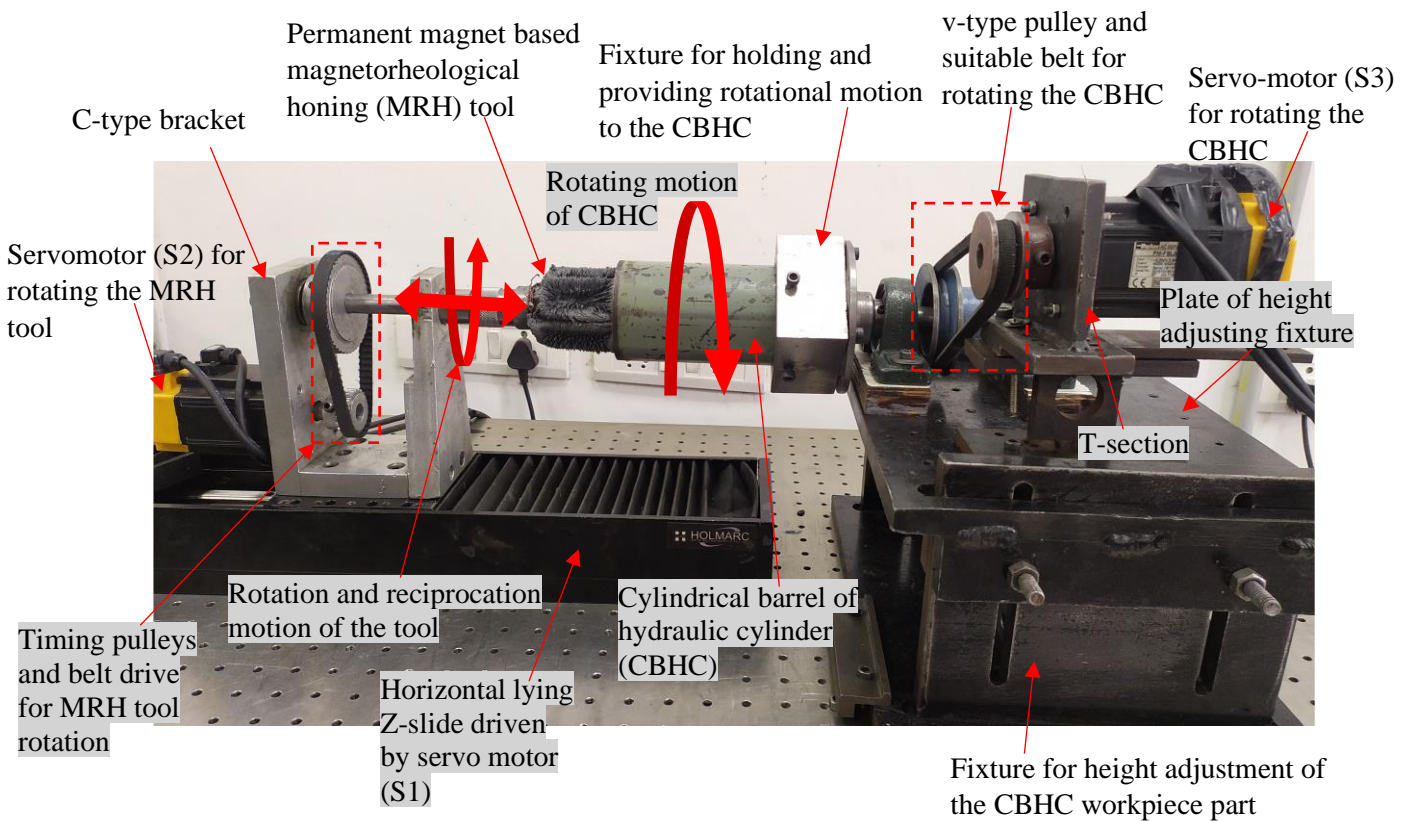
Experimentation on finishing the inside surface of the cylindrical barrel of hydraulic cylinder (CBHC) using the rotational magnetorheological honing (R-MRH) finishing process.
